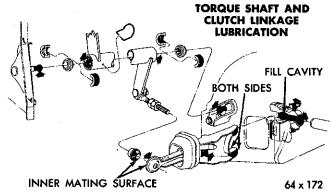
Clutch Linkage and Torque Shaft Lubrication
